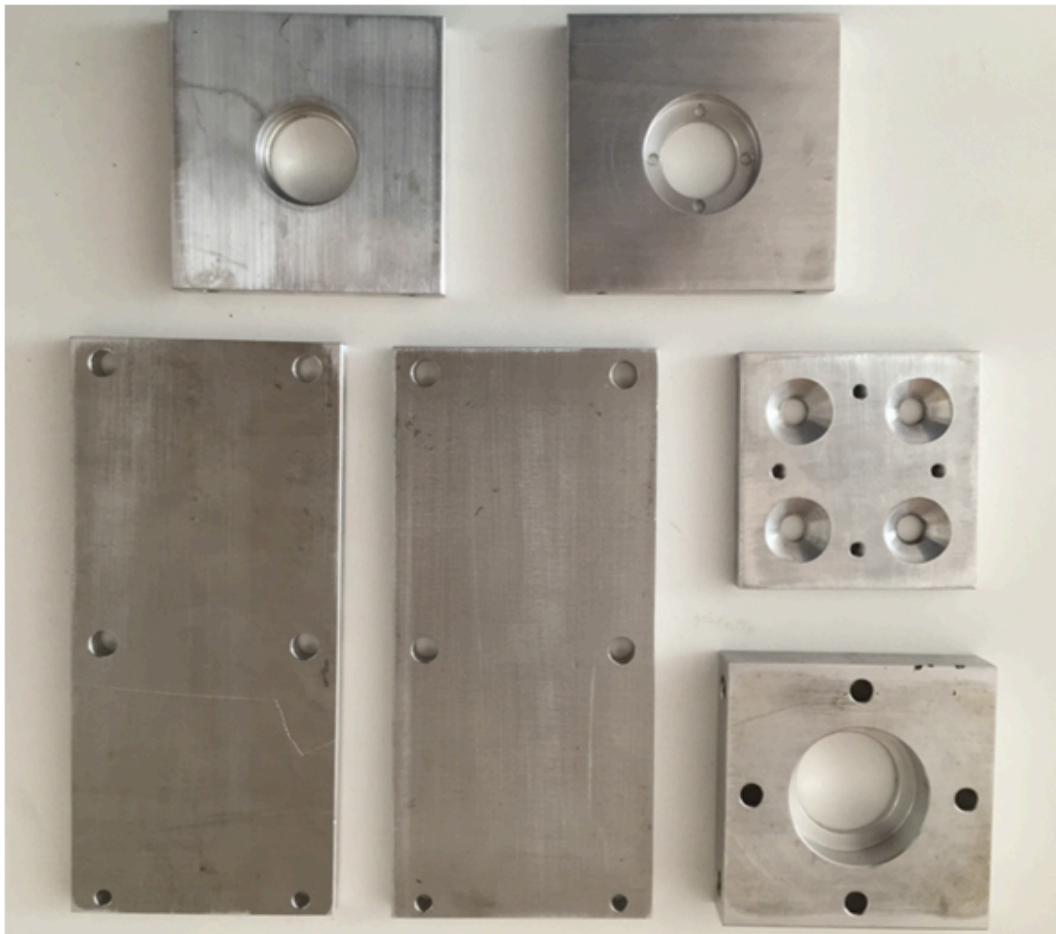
Mechanical parts for *joint 1*, Aluminum Alloy 6082.
